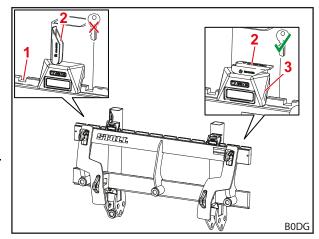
Locking mechanism of the frame part (left – open, right – closed)
